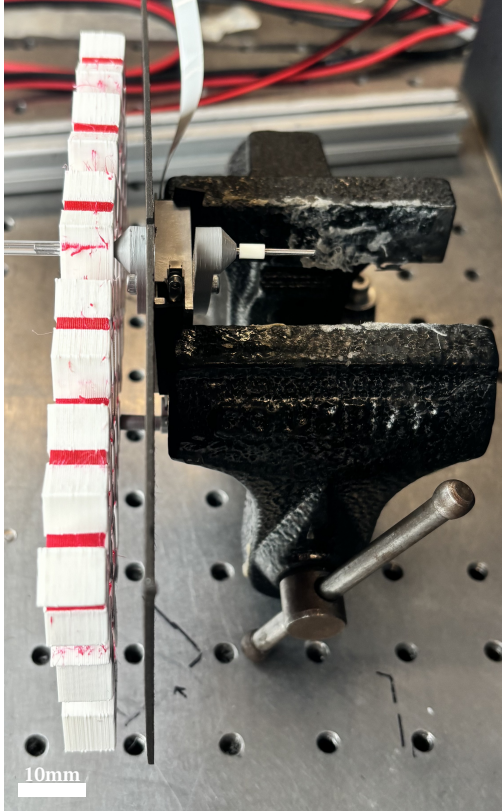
Detailed pictures of the 3D printing process with two materials.
